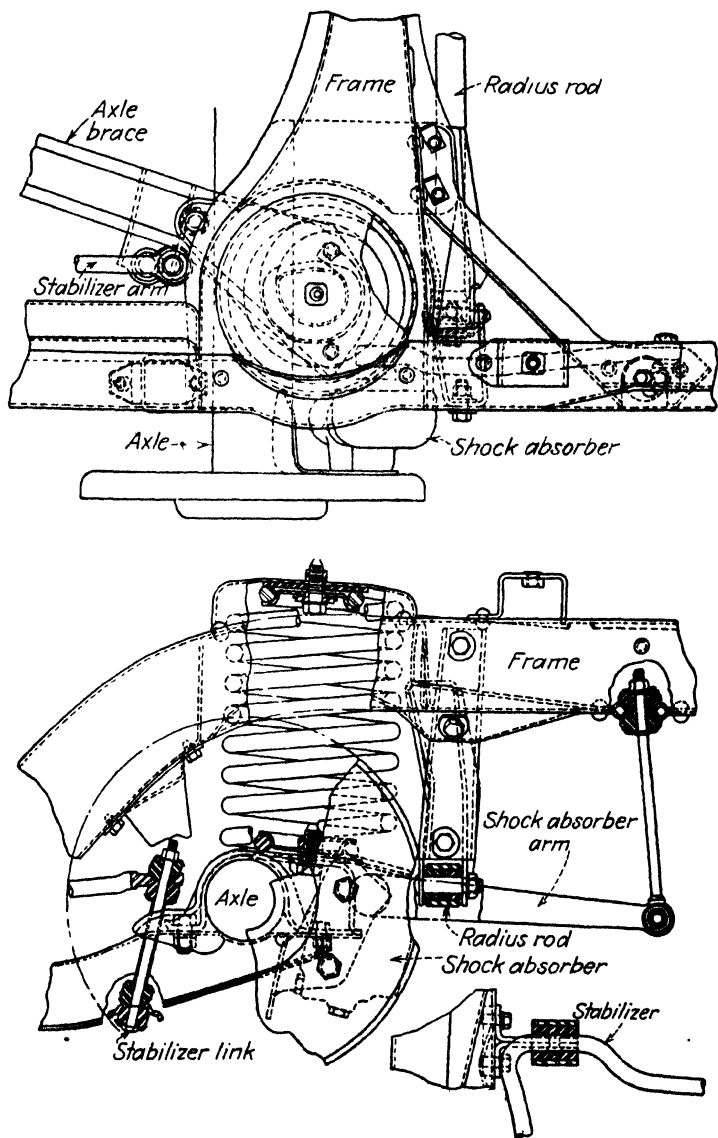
BUICK REAR SUSPENSION ON COIL SPRINGS.
